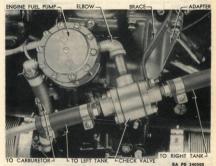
Engine Fuel Pump and Feed Pipe Check Valve
